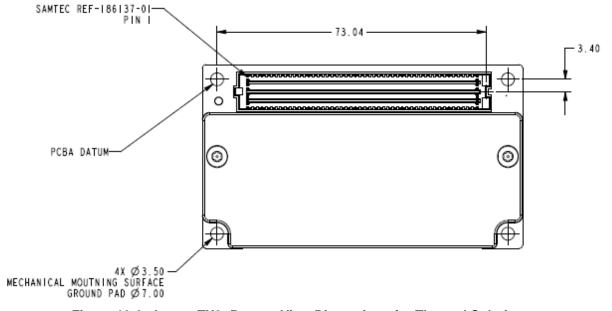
Jetson TX2: Bottom View Dimensions for Thermal Solution
